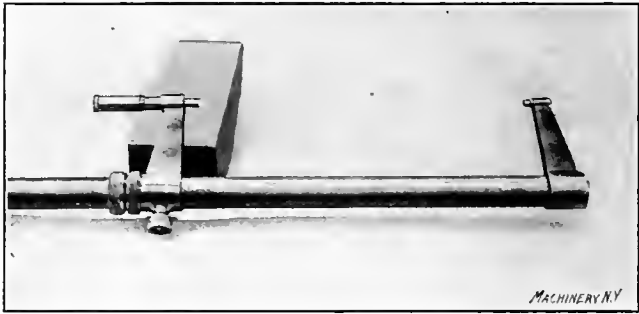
Improved Method of Making Crossheads and Tie-rods
